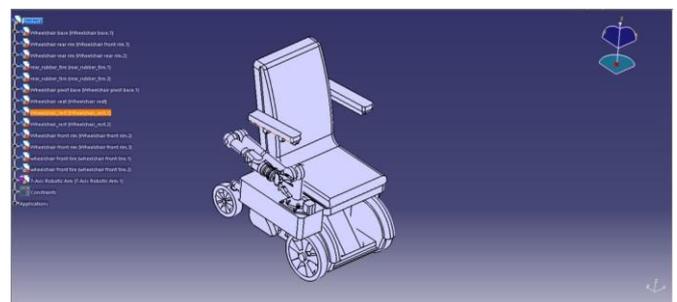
Wheelchair with folded mechanical arm in CATIA V5R21
